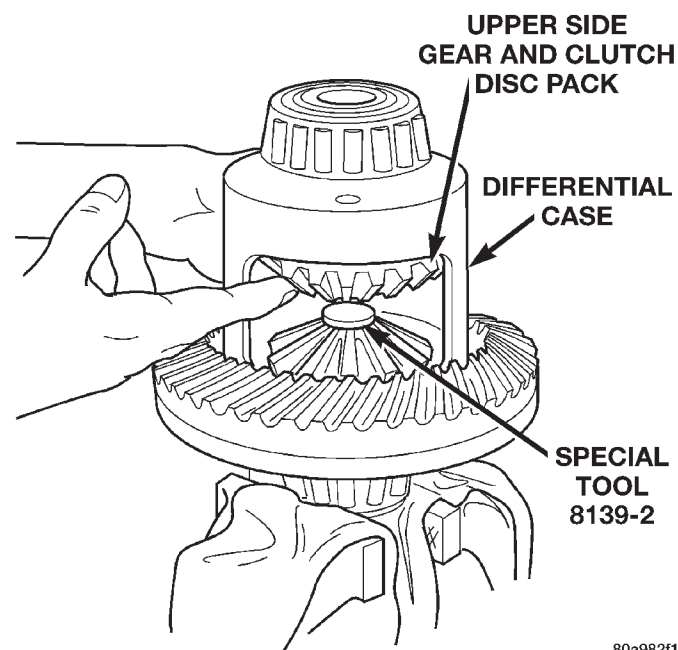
Upper Side Gear & Clutch Disc Pack Installation
